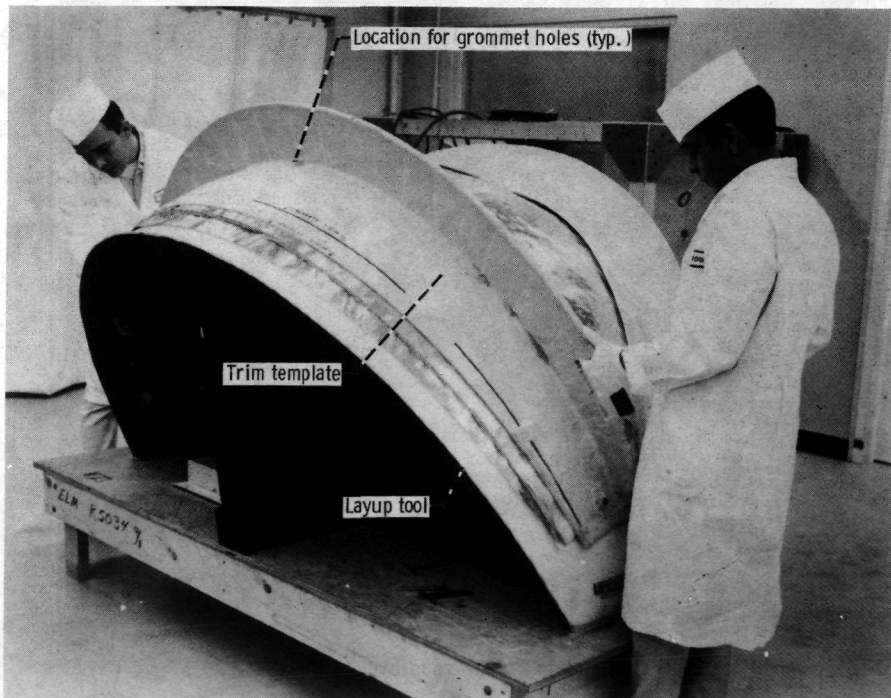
Hand ironing of partially formed reinforced-Mylar cover sheet on layup tool.
